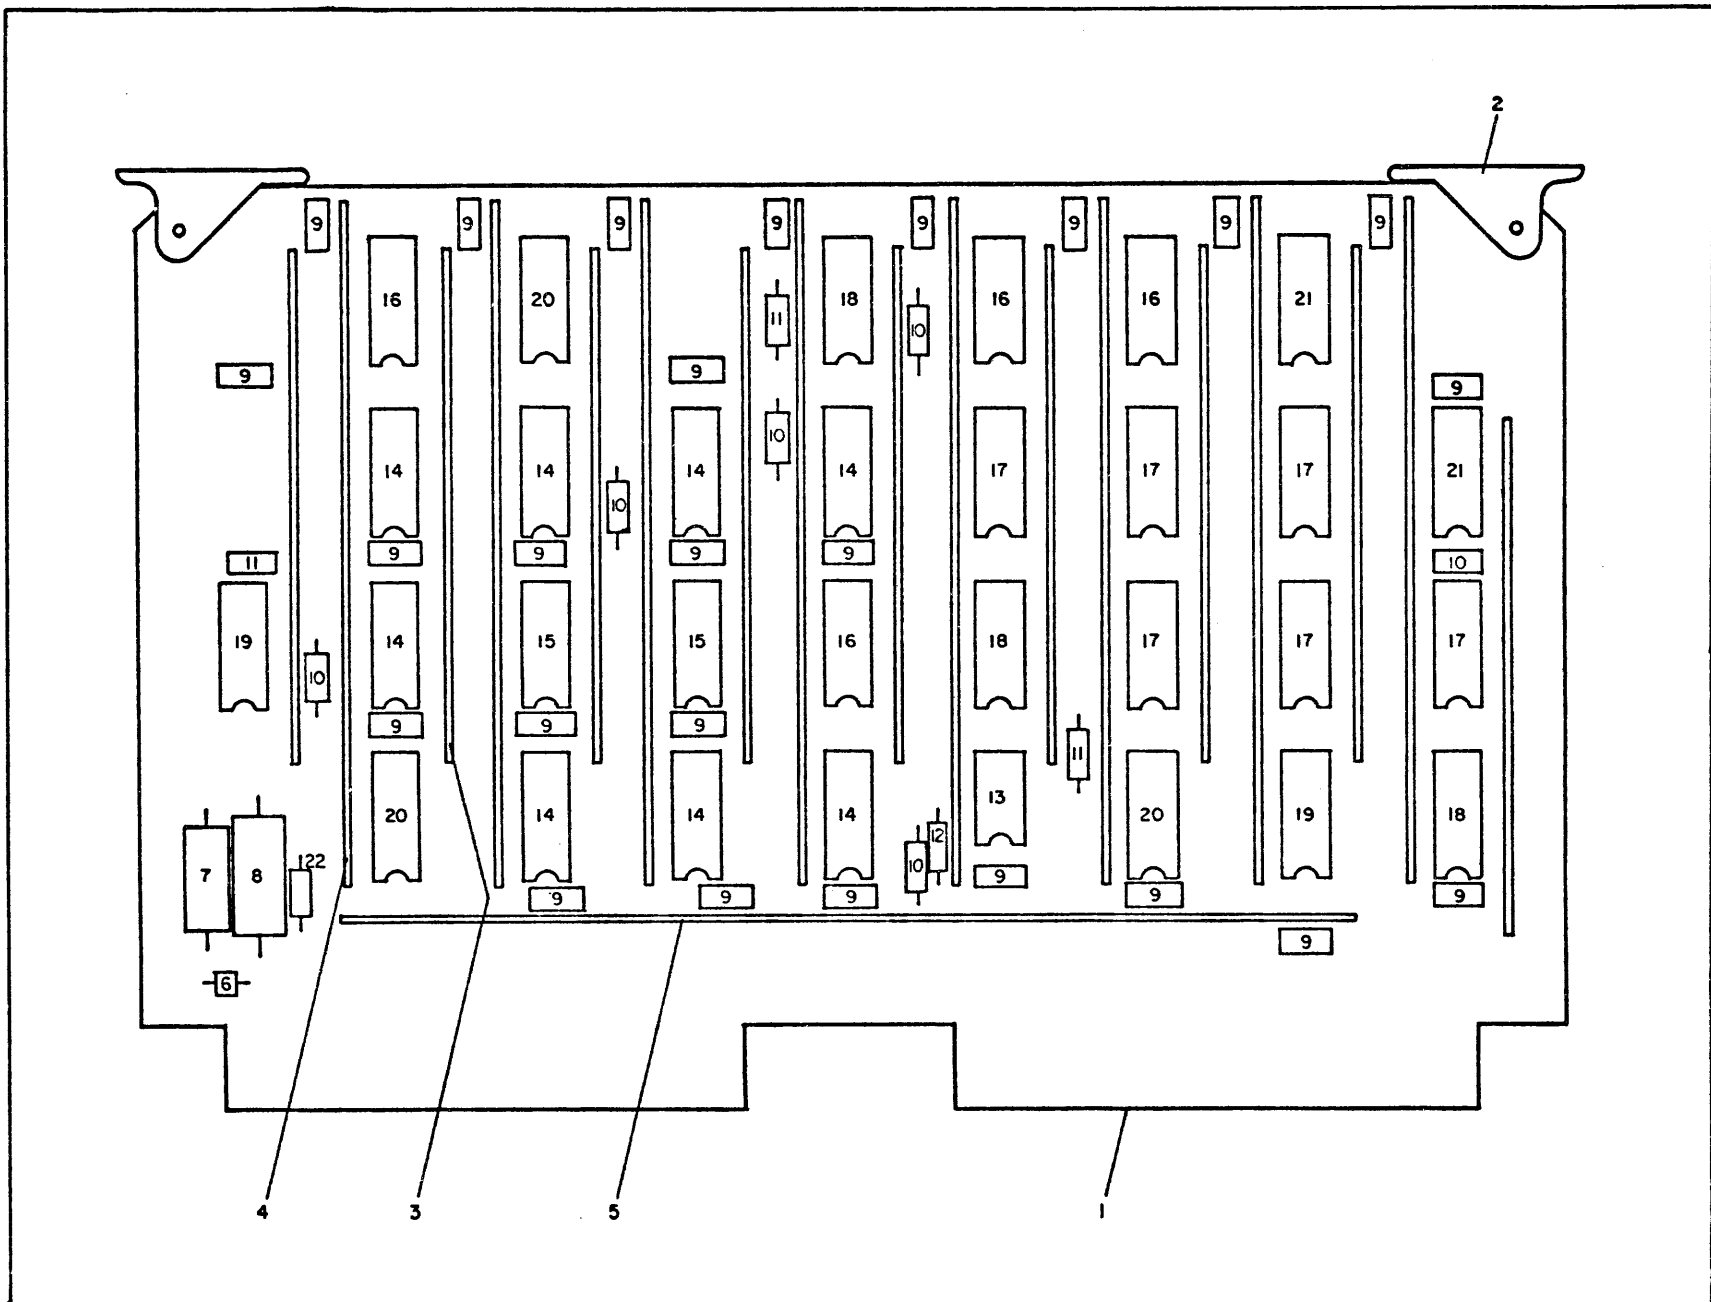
PC ASSEMBLY - SYNC CARD
